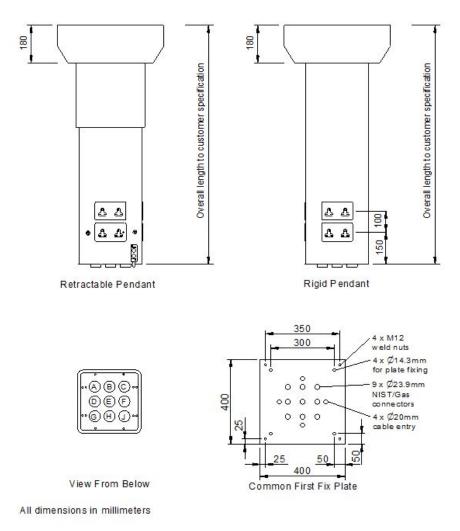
Rigid and Retractable Pendant Installation Overall Dimensions
